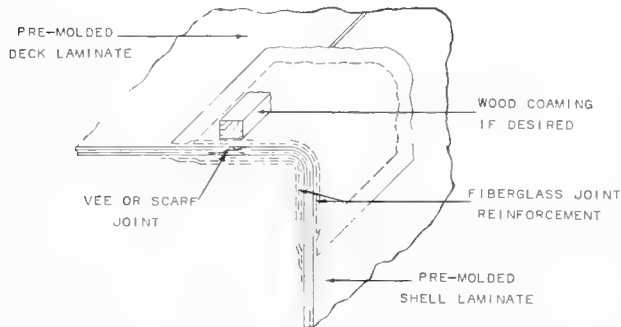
Deck Edge Connection - Wood Coaming and Joint in Deck
